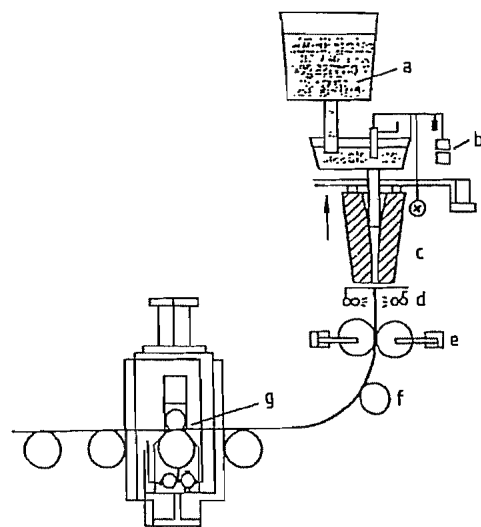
Casting-press-rolling process: a) Ladle; b) Tundish; c) Mold; d) Descaling; e) Press rollers; f) Bending roller; g) Straightening unit.
